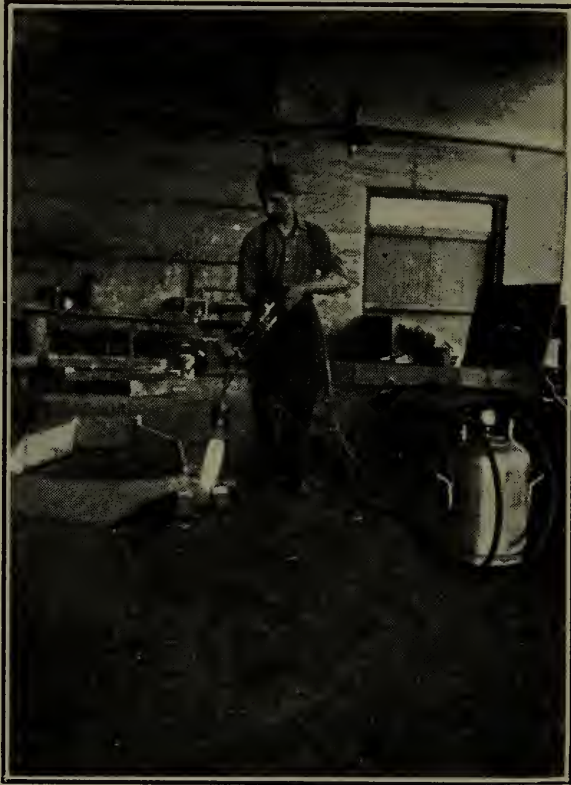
Oil burners can be used to salvage condemned castings. The illustration shows the method of applying the burner to this class of work.
